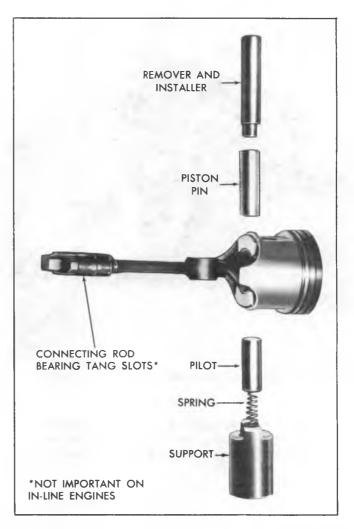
Piston Pin and Tool Layout (In-Line and "Small V8")
